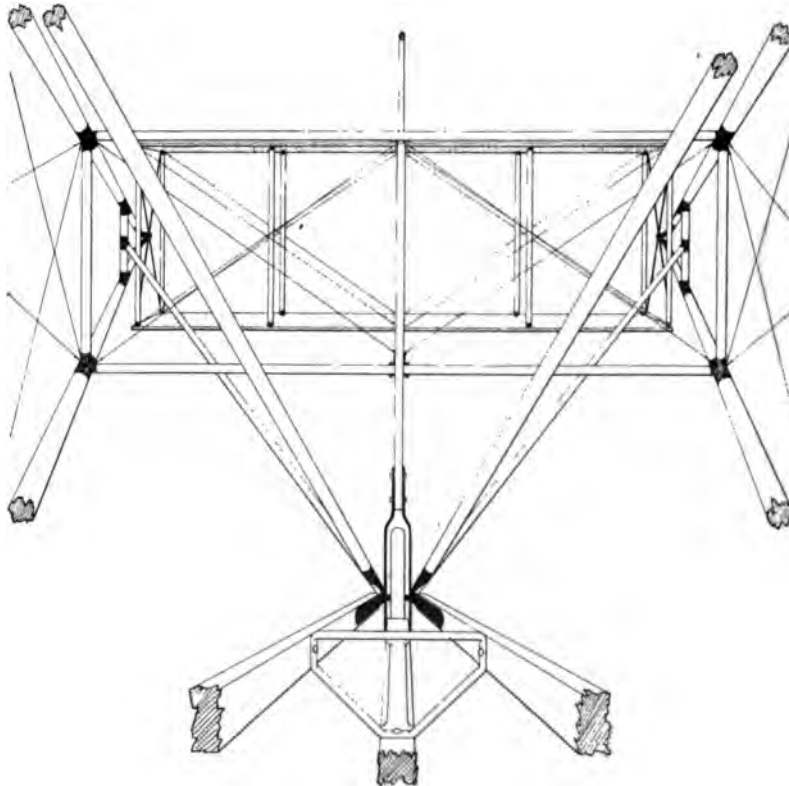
Details of Outriggers and Front Elevating Planes as Seen from Driver's Seat
